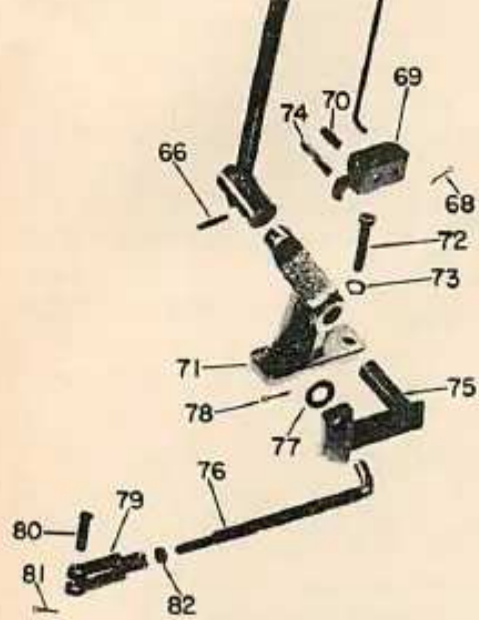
Pto clutch lever assembly and linkage for dual speed power take-off. Latch (69) locks lever in disengaged position.
